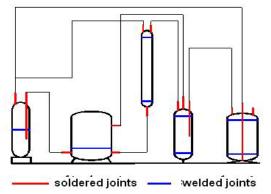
Diagram of welded and soldered joints of small pressure tanks
